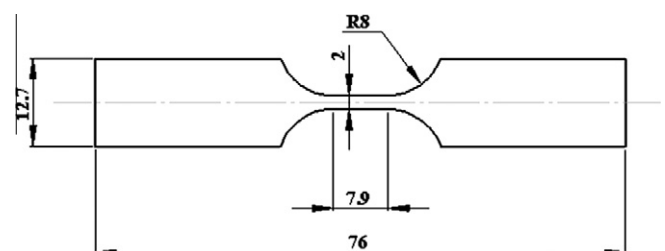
Schematic of the fatigue samples used in this study (dimensions in mm).
